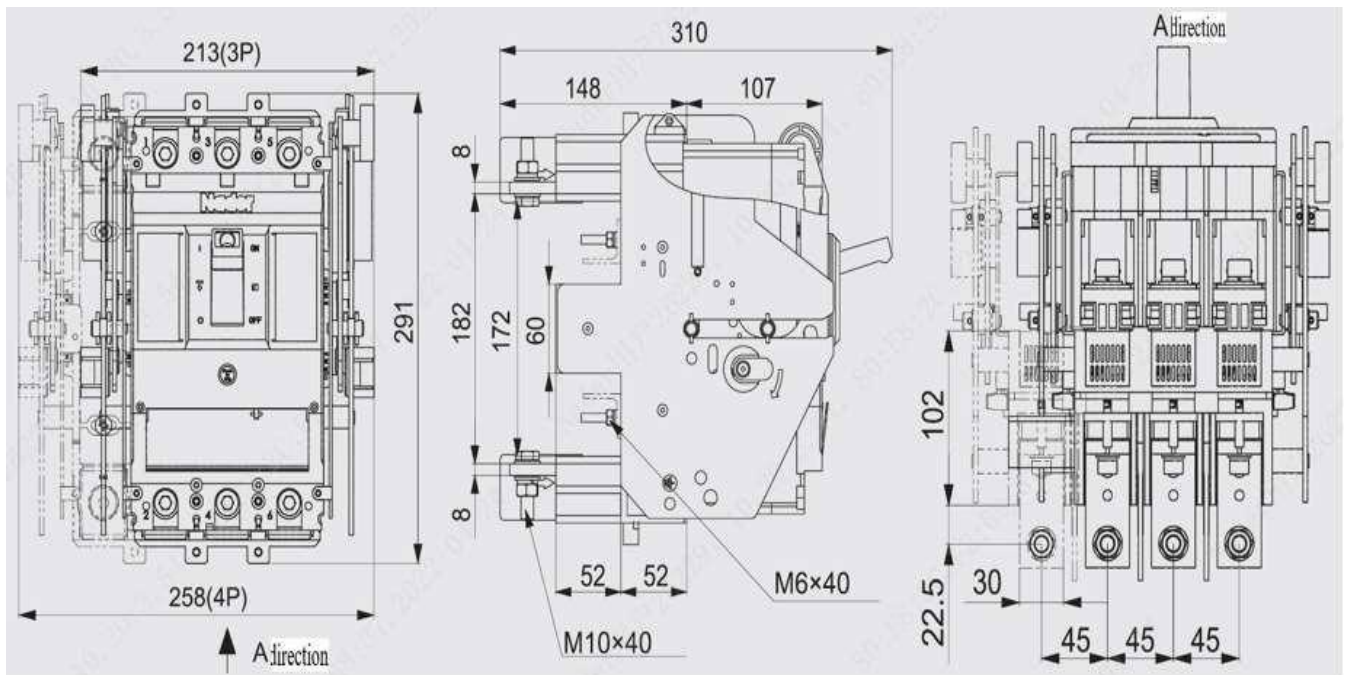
3P、4P Outline dimension drawing of withdrawable board rear wiring products
